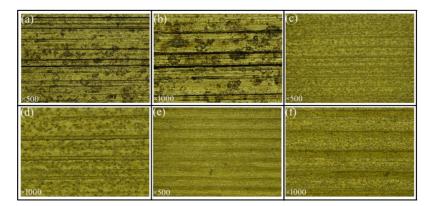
Surface morphology of the workpiece (workpiece material: Inconel 718). (a), (b) Dry cutting. (c), (d) External cooling. (e), (f) Internal cooling¹¹¹.
